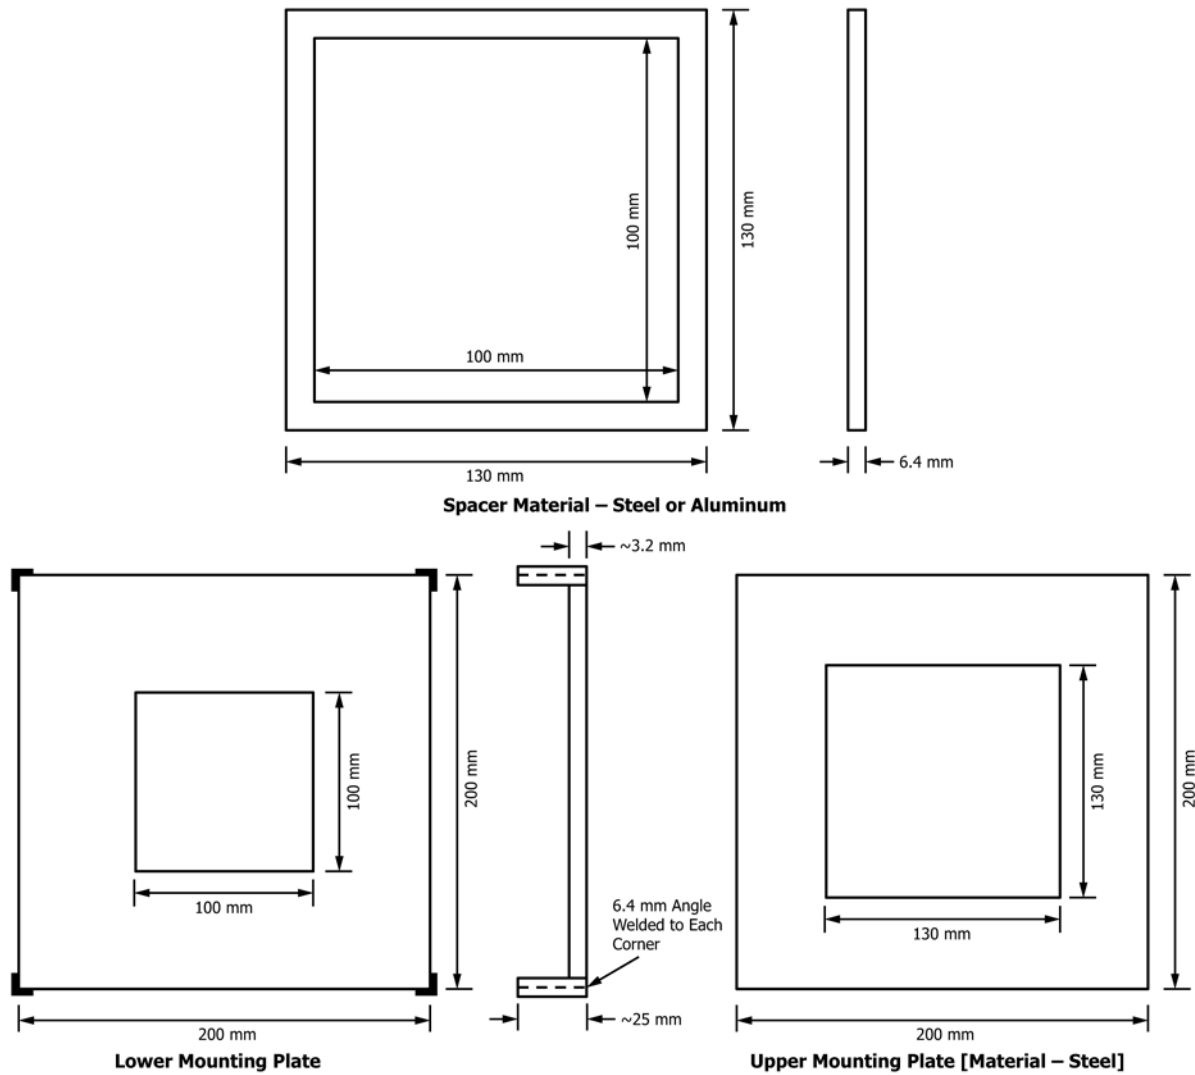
Details of Specimen Holder Construction, Specimen Holder Parts
